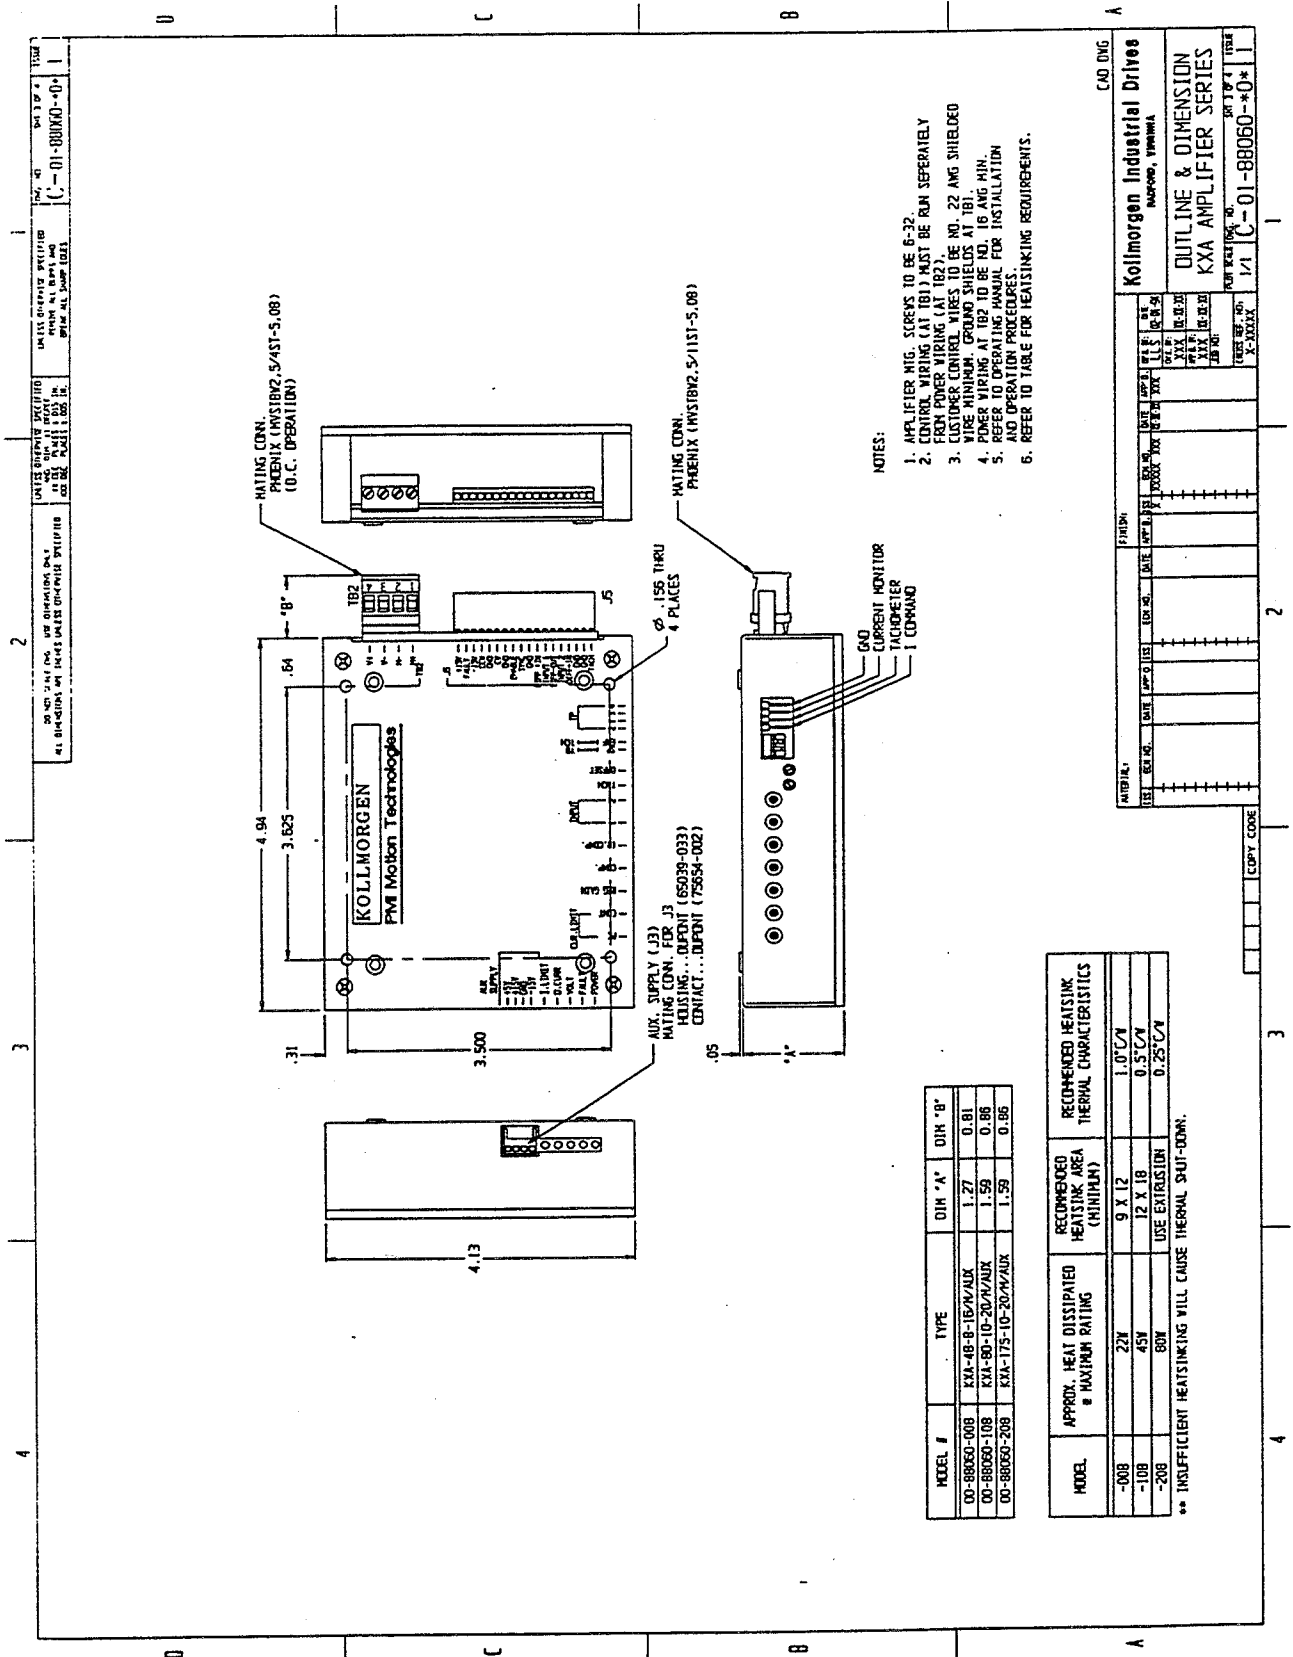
Outline Drawing C-01-88060-*0* Sheet 3 of 4
